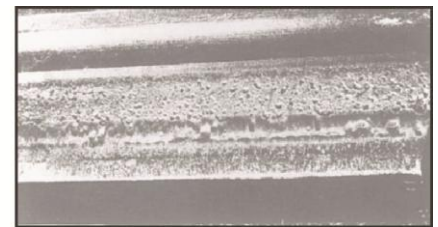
Same gear tooth flank, 16 months after addition of 10 percent by volume Dow Corning M Gear Oil Additive, shows the surface has become noticeably smoother.
